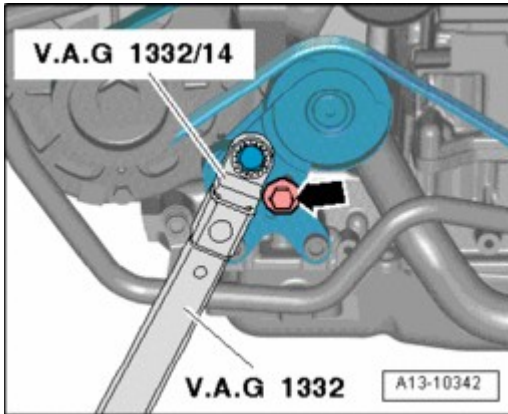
Positioning Torque Wrench With Socket AF 16 mm V.A.G 1332/14 On Tensioning Roller Hex Head And Tension Ribbed Belt To 70 Nm
